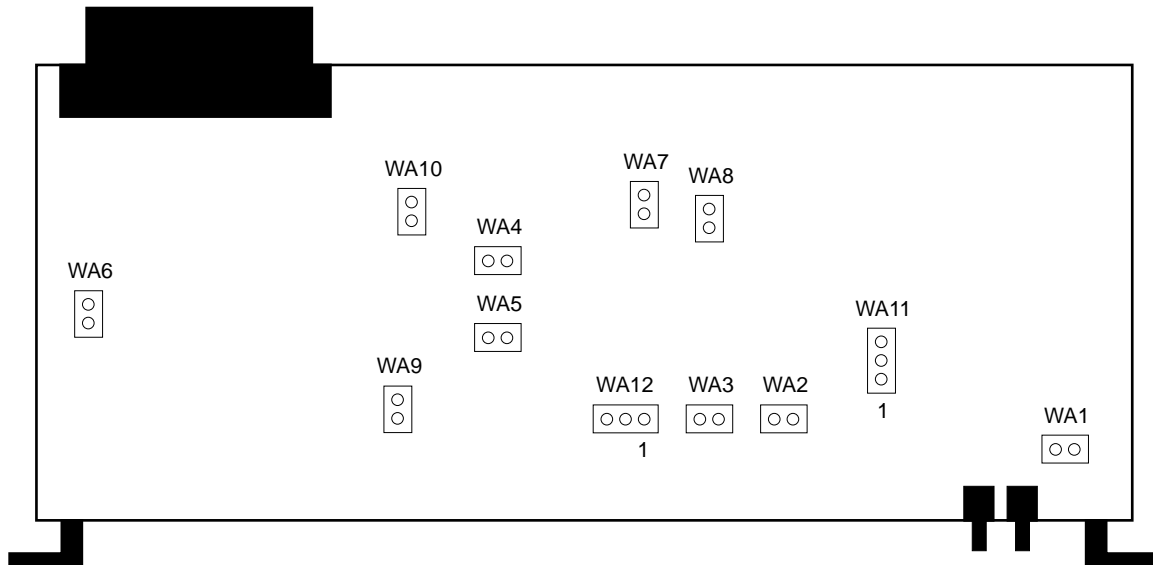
Jumper Positions on CMC13 I/O Board
